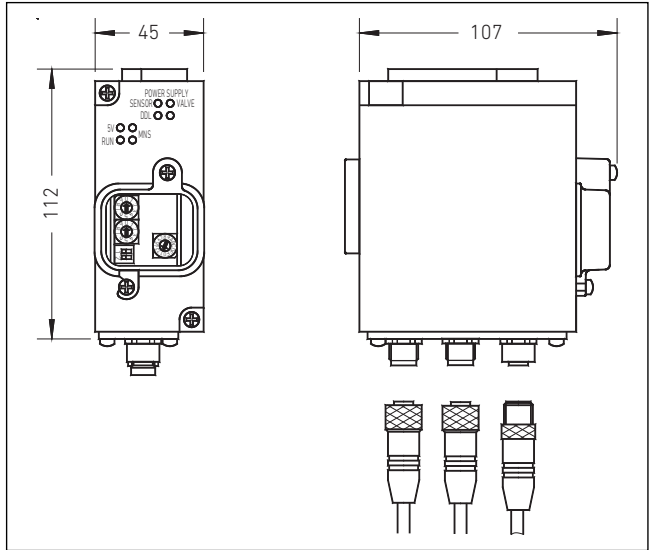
Dimensions of the bus coupler with drivers (R412006998)
